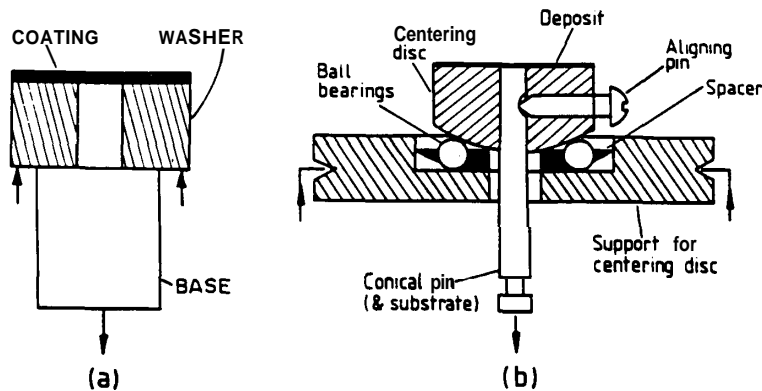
(a) Specimen for determining adhesion strength; (b) centering device and specimen in cross-section [28].
